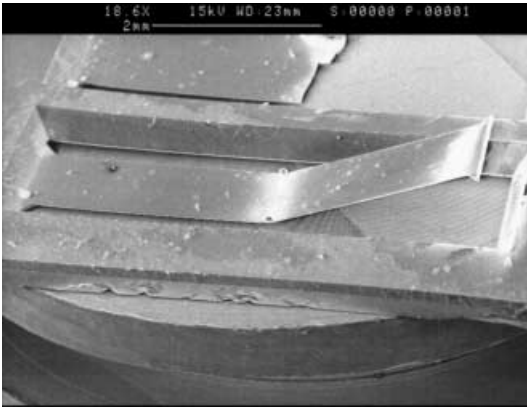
Beam fastened at one side, bent by laser heating at position B
